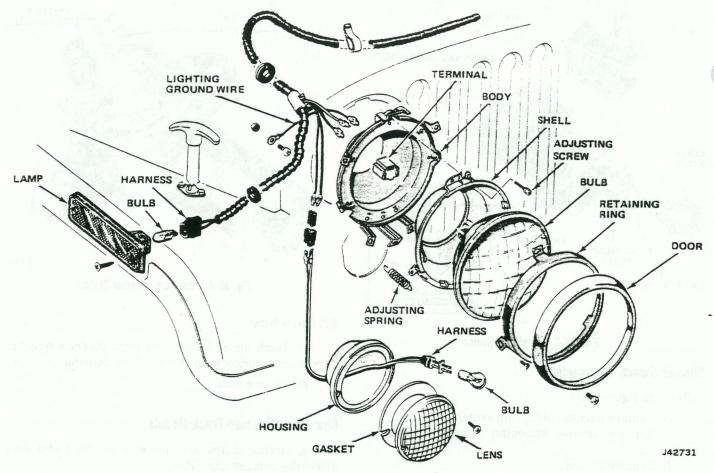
R-5 Headlamp, Parking, Directional and Side Marker Lamps-CJ Models
